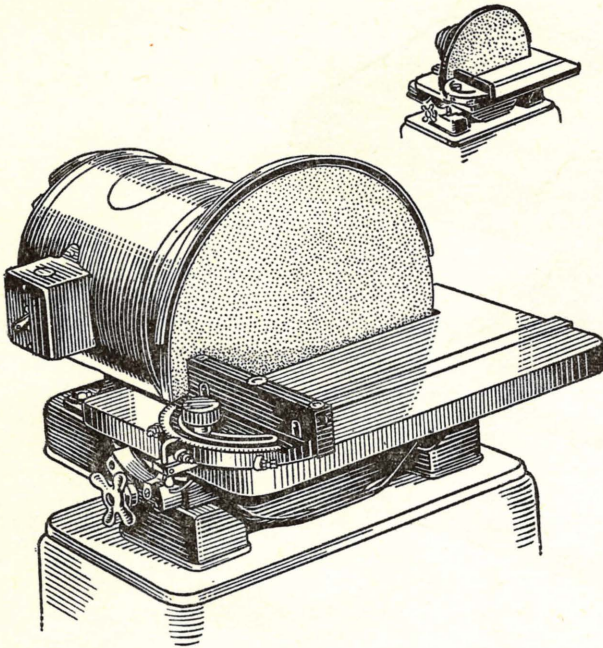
The disc sander may be driven directly by a motor, or have a belt drive. Its use should be limited to end grain and curved edges
